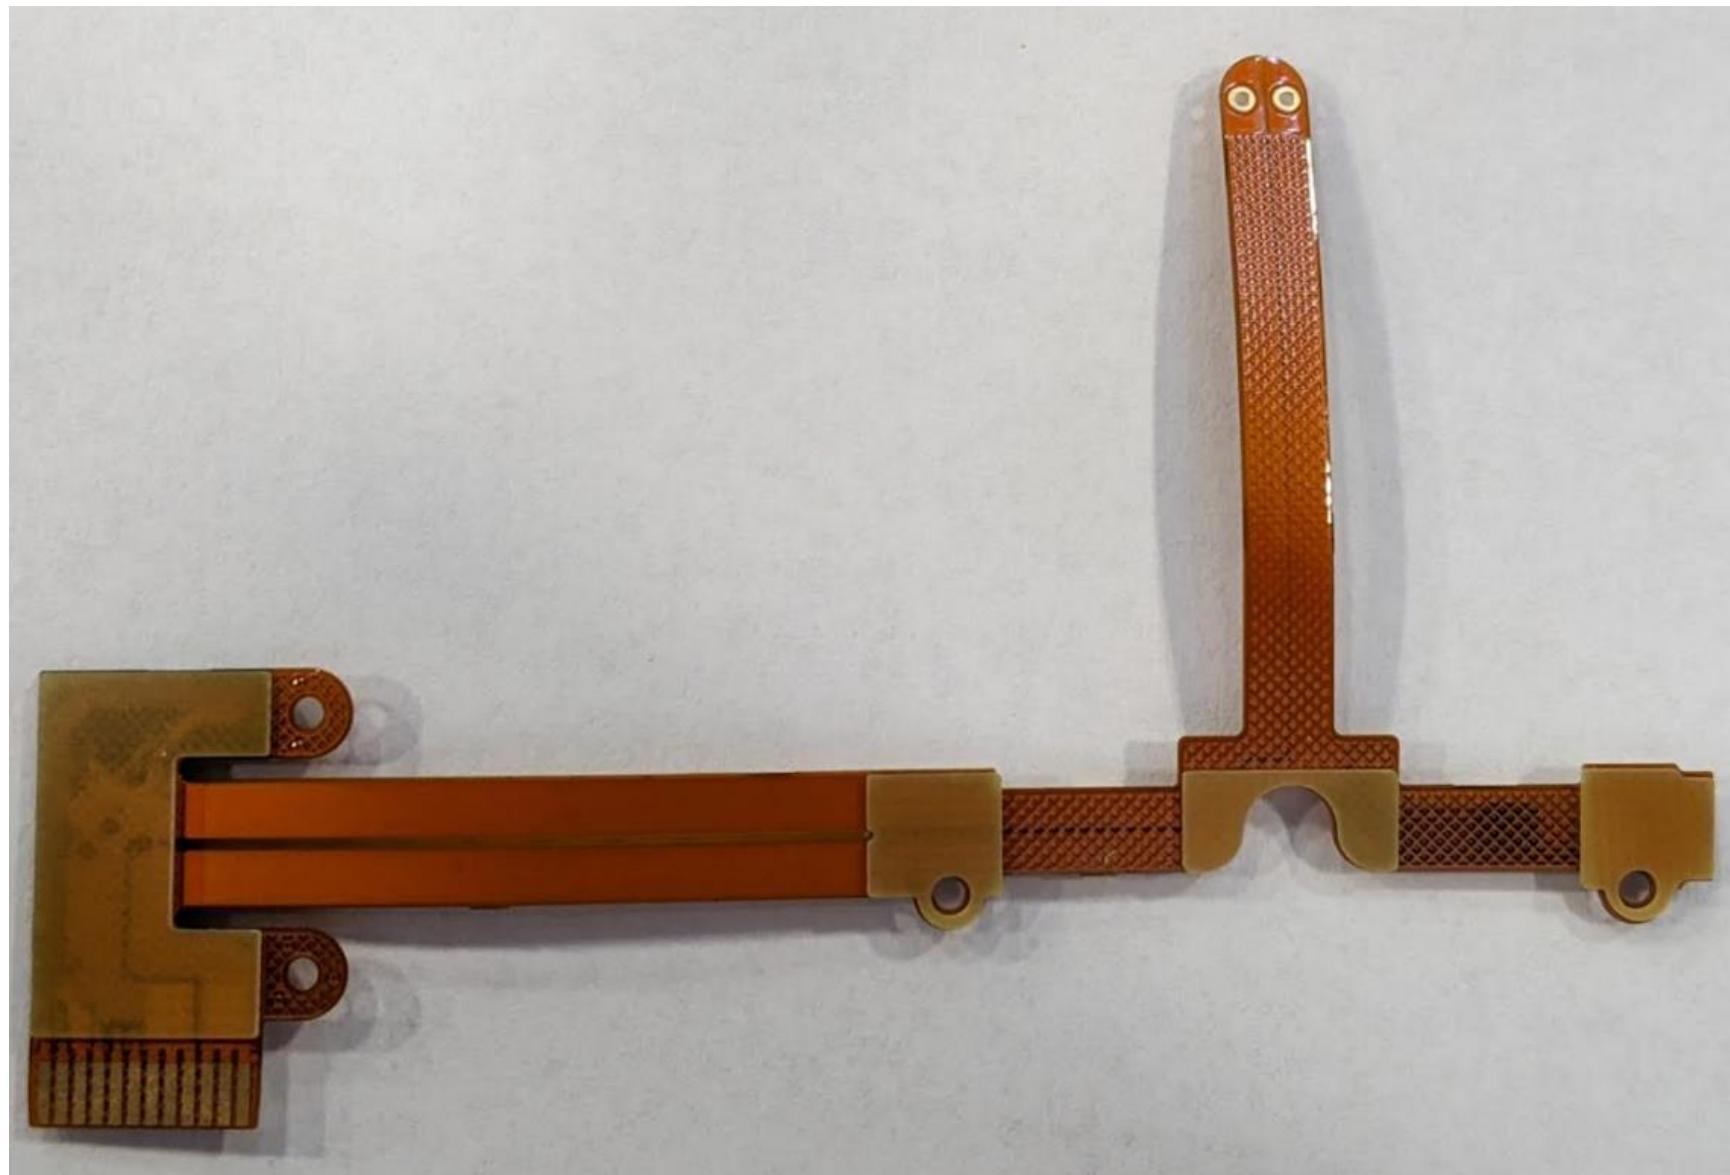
GF-PCA-00173- Flex Head PCBA- Bottom Side
